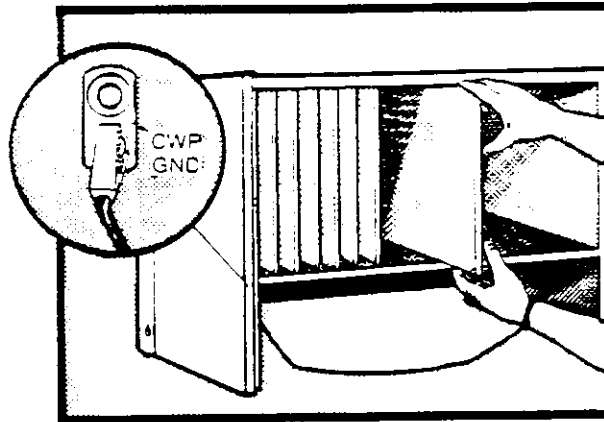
PCB INSERTION, EK-824/1232/1648
